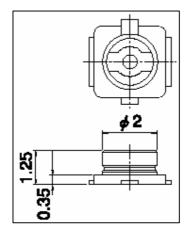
Mechanical dimensions of U.FL-R-SMT connector
